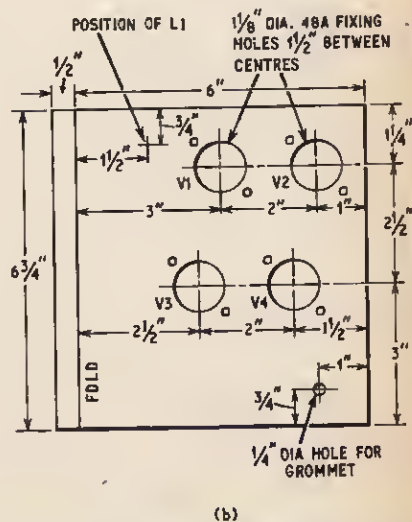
Drilling details of the side panel, with a fold for fixing to the front panel
